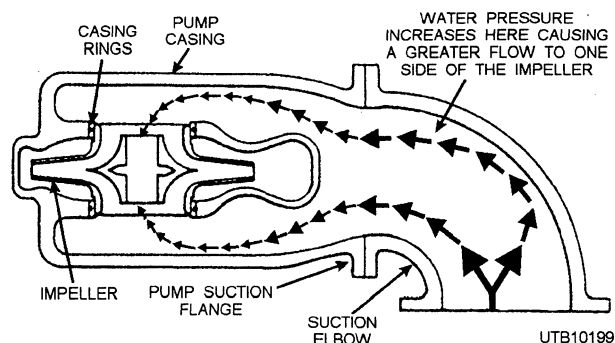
Unbalanced loading of a double-suction impeller.
